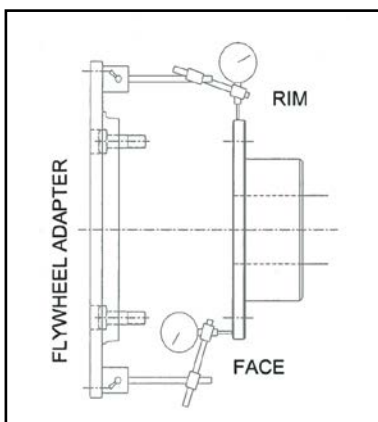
DIAL INDICATOR MOUNTING FOR RIM & FACE READINGS
